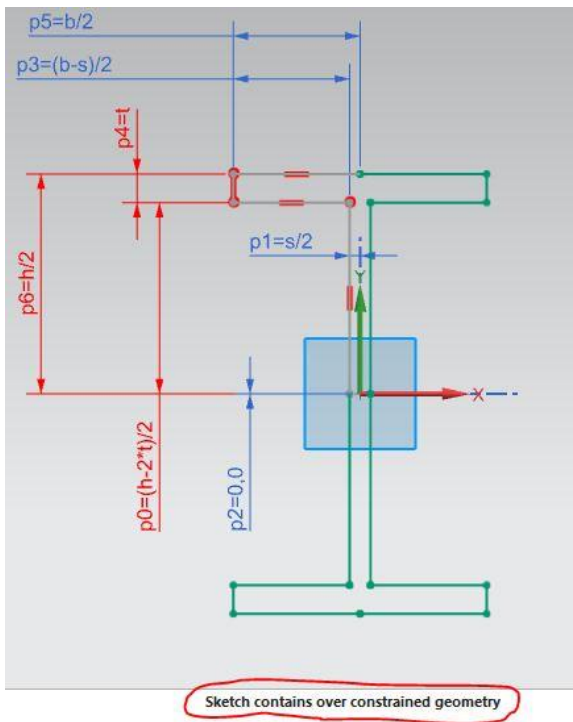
Over constrained sketch, too many dimensions describing the sketch
